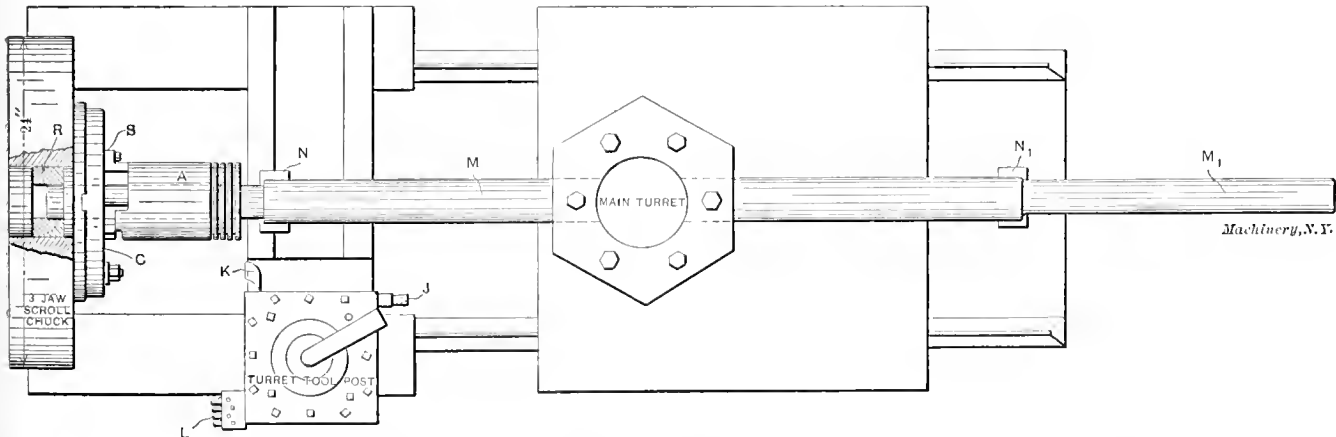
Special Chuck and Tools for Turning, Boring and Cutting Off Eccentric Piston Rings in the Gisholt Lathe.
